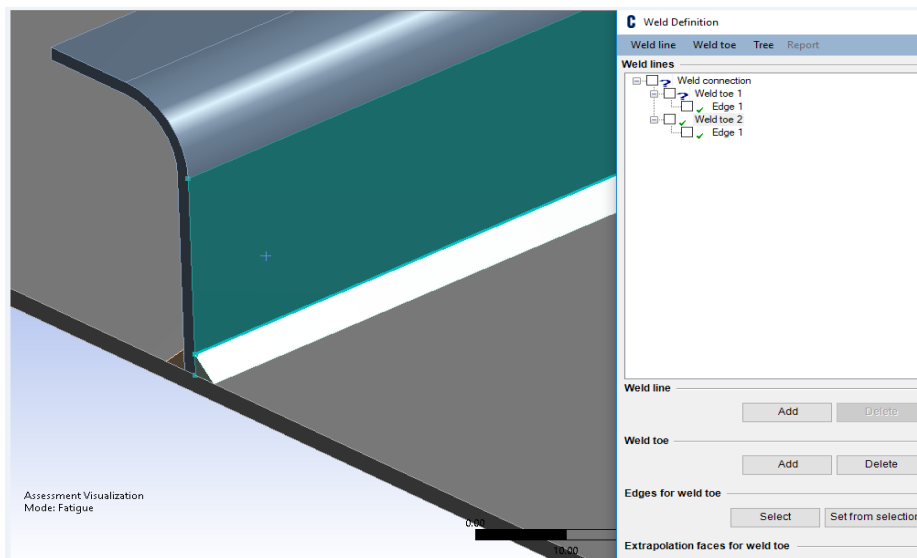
Weld toe and extrapolation surface defined on stringer
